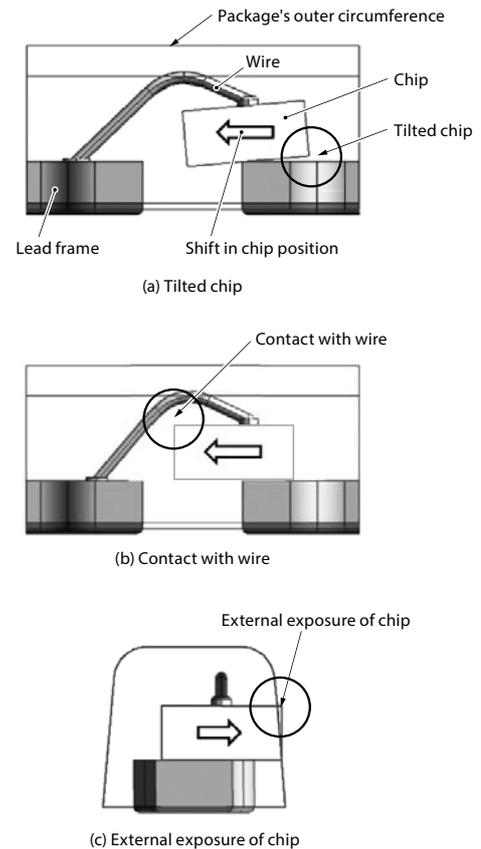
Examples of defects caused by chip position shift. A chip could tilt, a bonding wire could get into contact with an edge of the chip, and the chip could be exposed to the ambient. To prevent these problems, higher positioning precision is required for die bonding.
